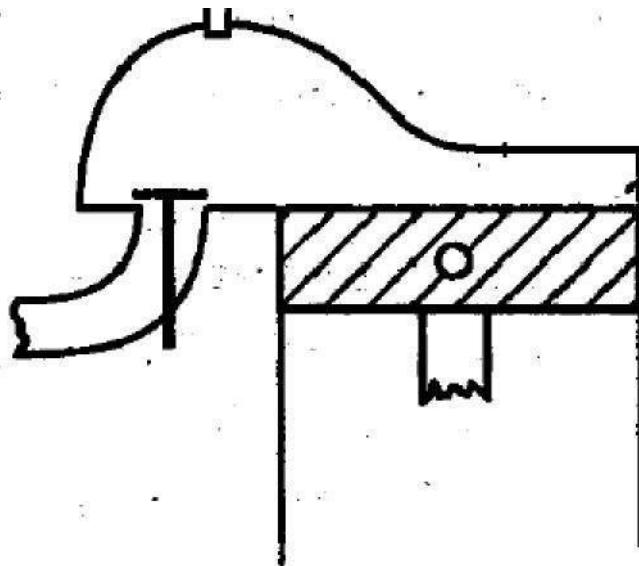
Ricardo's Turbulent Head combustion Chamber
